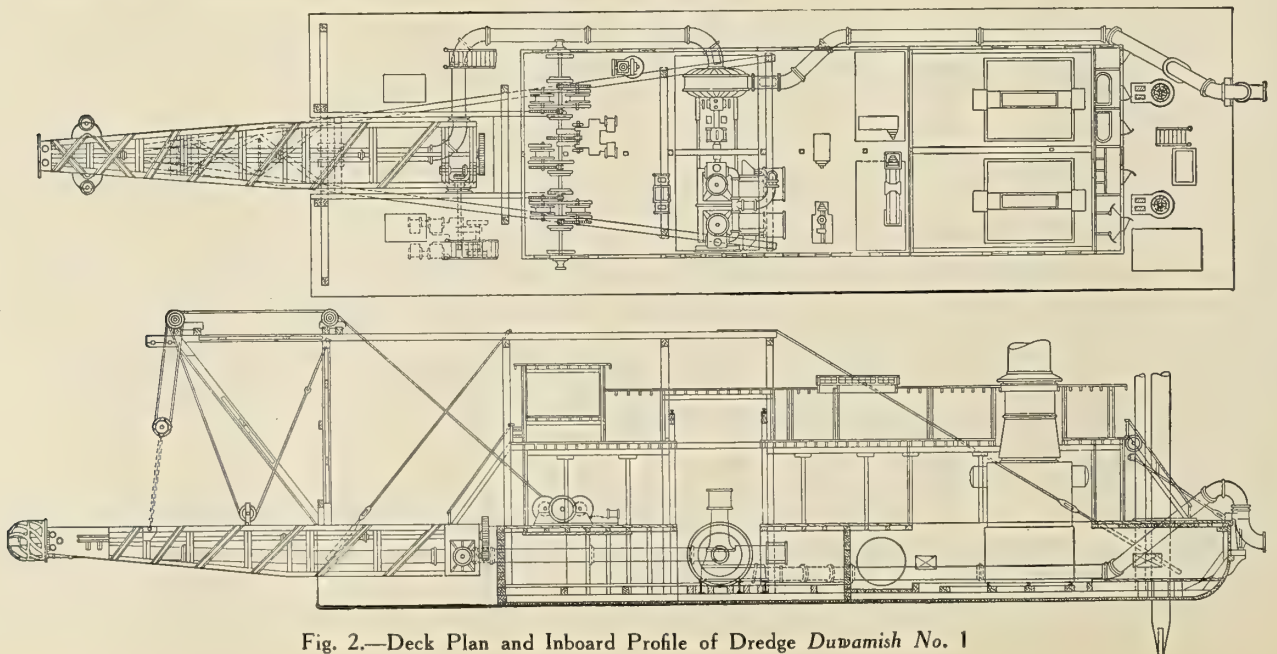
Deck Plan and Inboard Profile of Dredge *Duwamish No. 1
